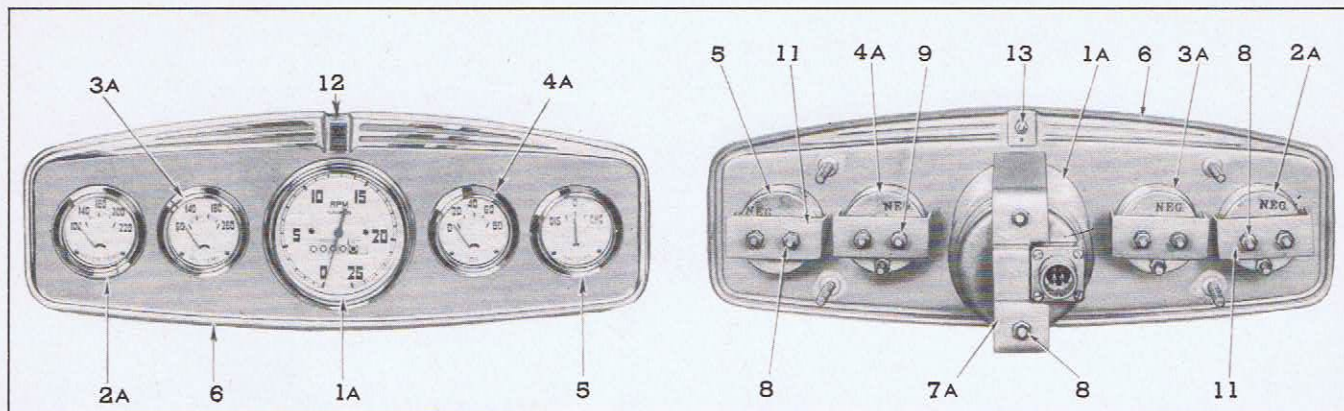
ELECTRICAL INSTRUMENT PANEL ASSEMBLY FOR SINGLE ENGINE UNIT.
